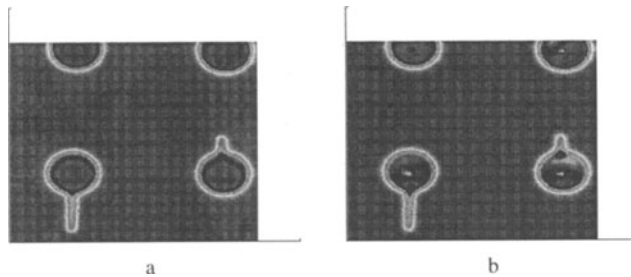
Rivets with EDM notch cracks a) imaginary, b) real.
